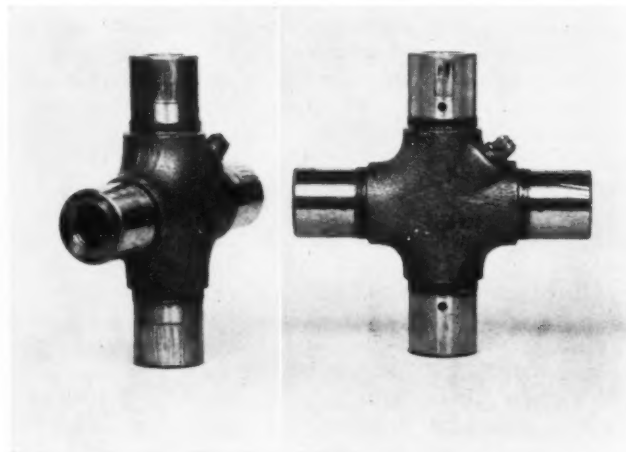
UNIVERSAL-JOINT SPIDER THAT WAS DAMAGED WHILE OPERATING IN A LABORATORY TEST FIXTURE
